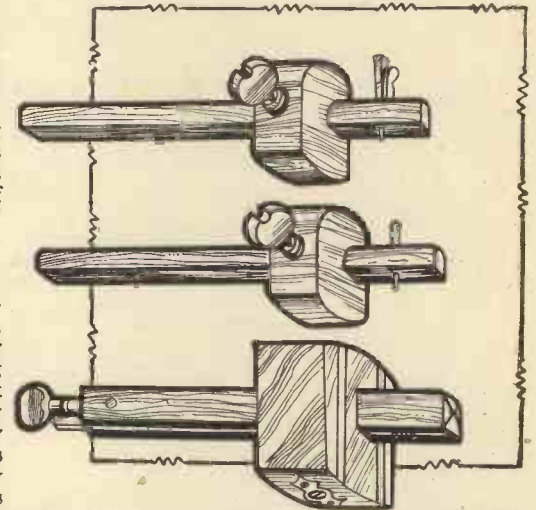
Gauges. (Top to bottom) Cutting gauge, single marking gauge, and mortise gauge.
